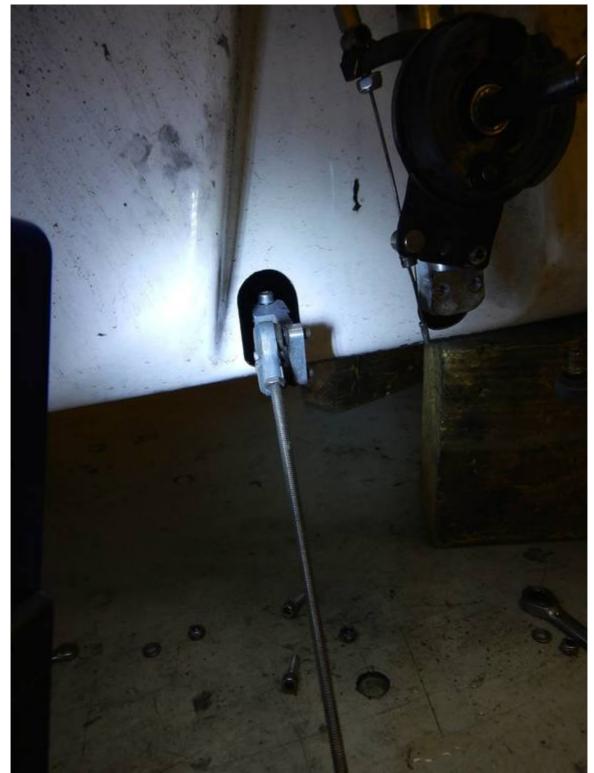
Pull and twist the steer upwards while holding the steer rod. Then take out the steering rods with steering lever.
